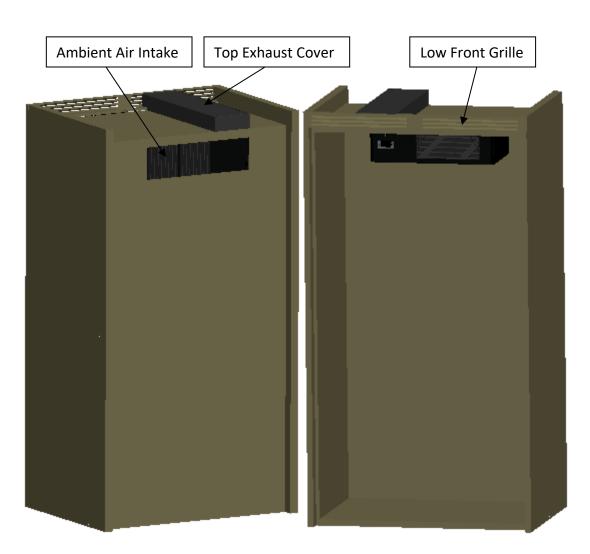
Cooling Unit Installed (Low Front Grille)
